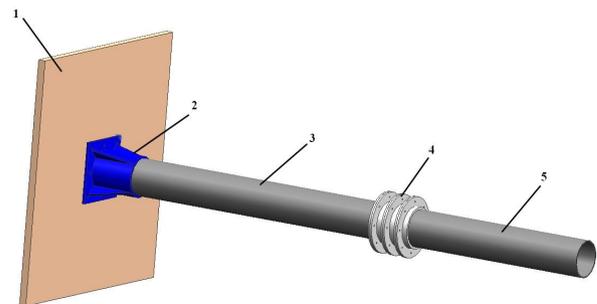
Assembly of test piece; 1-adapter plate; 2-adapter; 3-pipe 600 mm; 4-filtration setup; 5-pipe 400 mm
